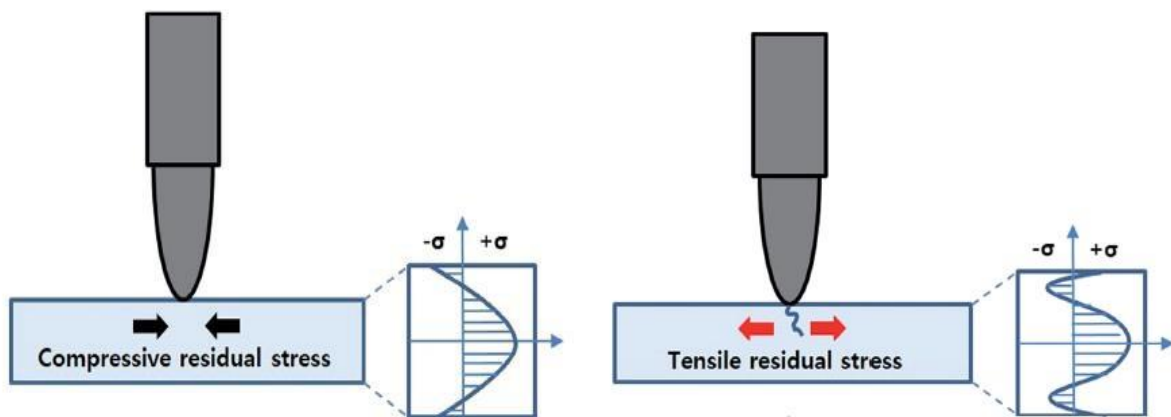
Compressive residual stress in the surface and tensile residual stress in the surface [34].
